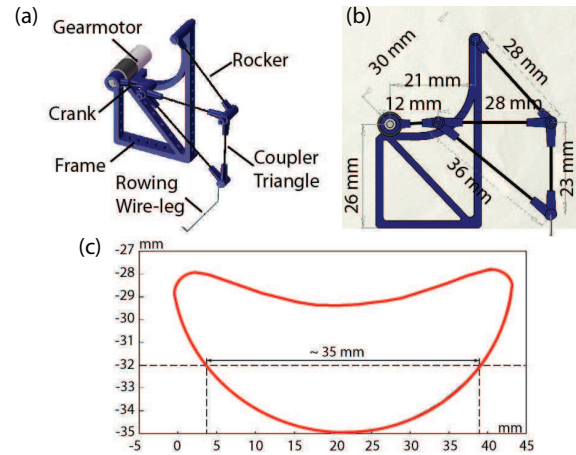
(a) Sketch of the four-bar actuating mechanism with a miniature gearmotor. (b) Significant dimensions of the four-bar actuator. (c) Simulation of the trajectory of the rowing wire-leg. The origin is fixed at the locus of the gearmotor.
